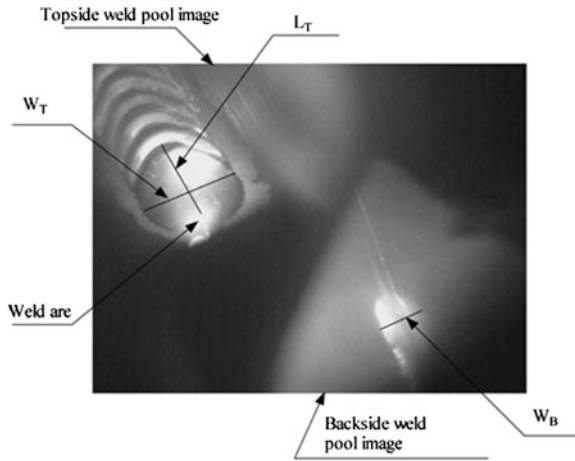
A frame of a complete weld pool image of pulsed GTAW
